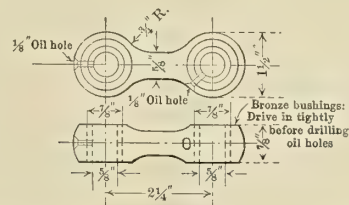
GUIDE ROD LINK. MAKE ONE OF MILD STEEL.
